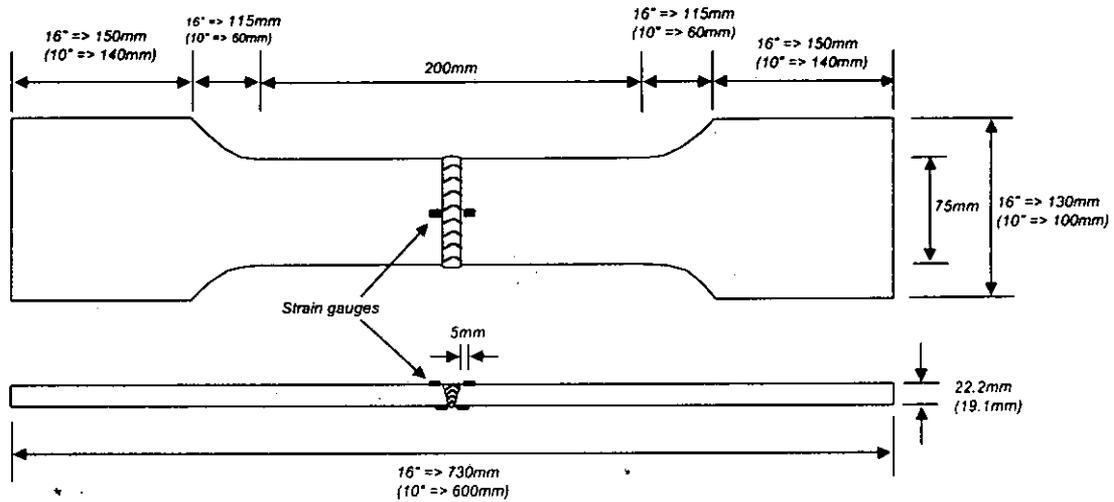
Geometry of Typical Strip Specimens Extracted from the 10" and 16" OD Girth Welds
